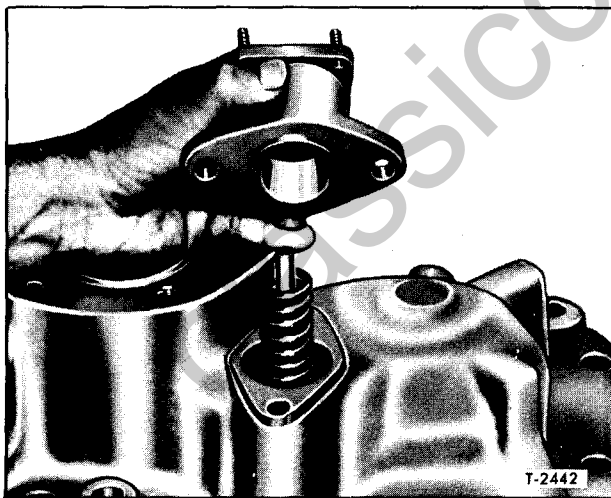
Inter-Axle Air Shift Chamber and Spring (Eaton)
